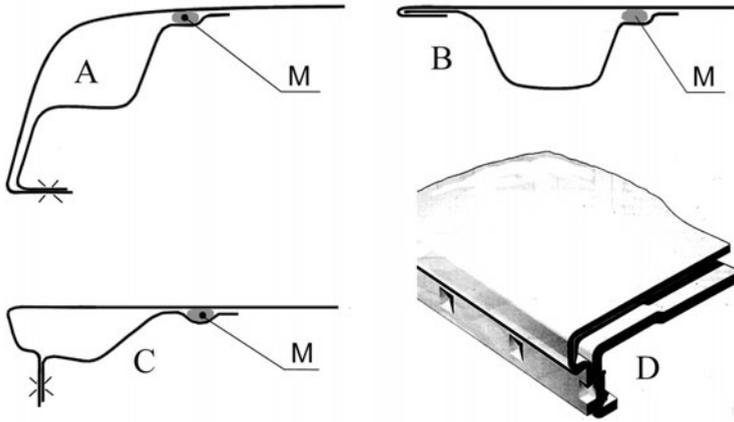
A: welded wrap over hood or hood including fenders; B: hem built-in hood; C: welded built-in hood; D: clinched hood; M: damping mastic.
